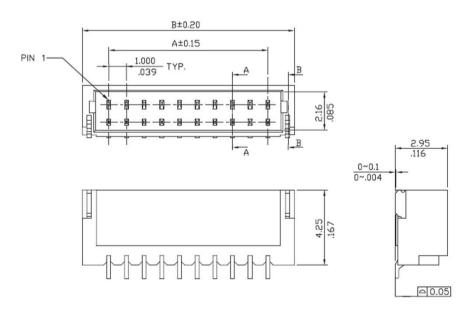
Back Extension Port 1.0 mm 8 pin drawing
